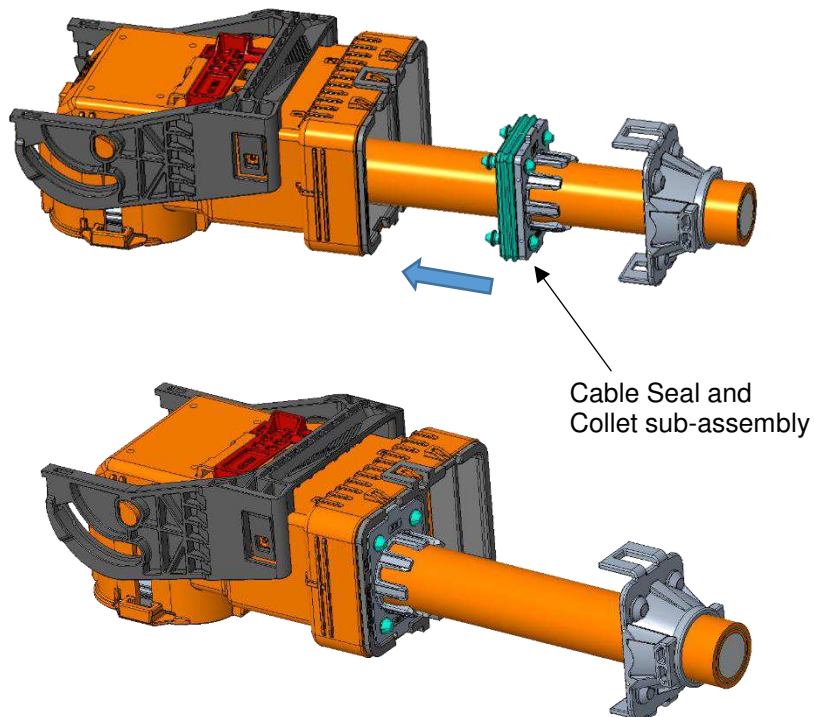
Cable Seal – Collet sub-assembly, Assembly
